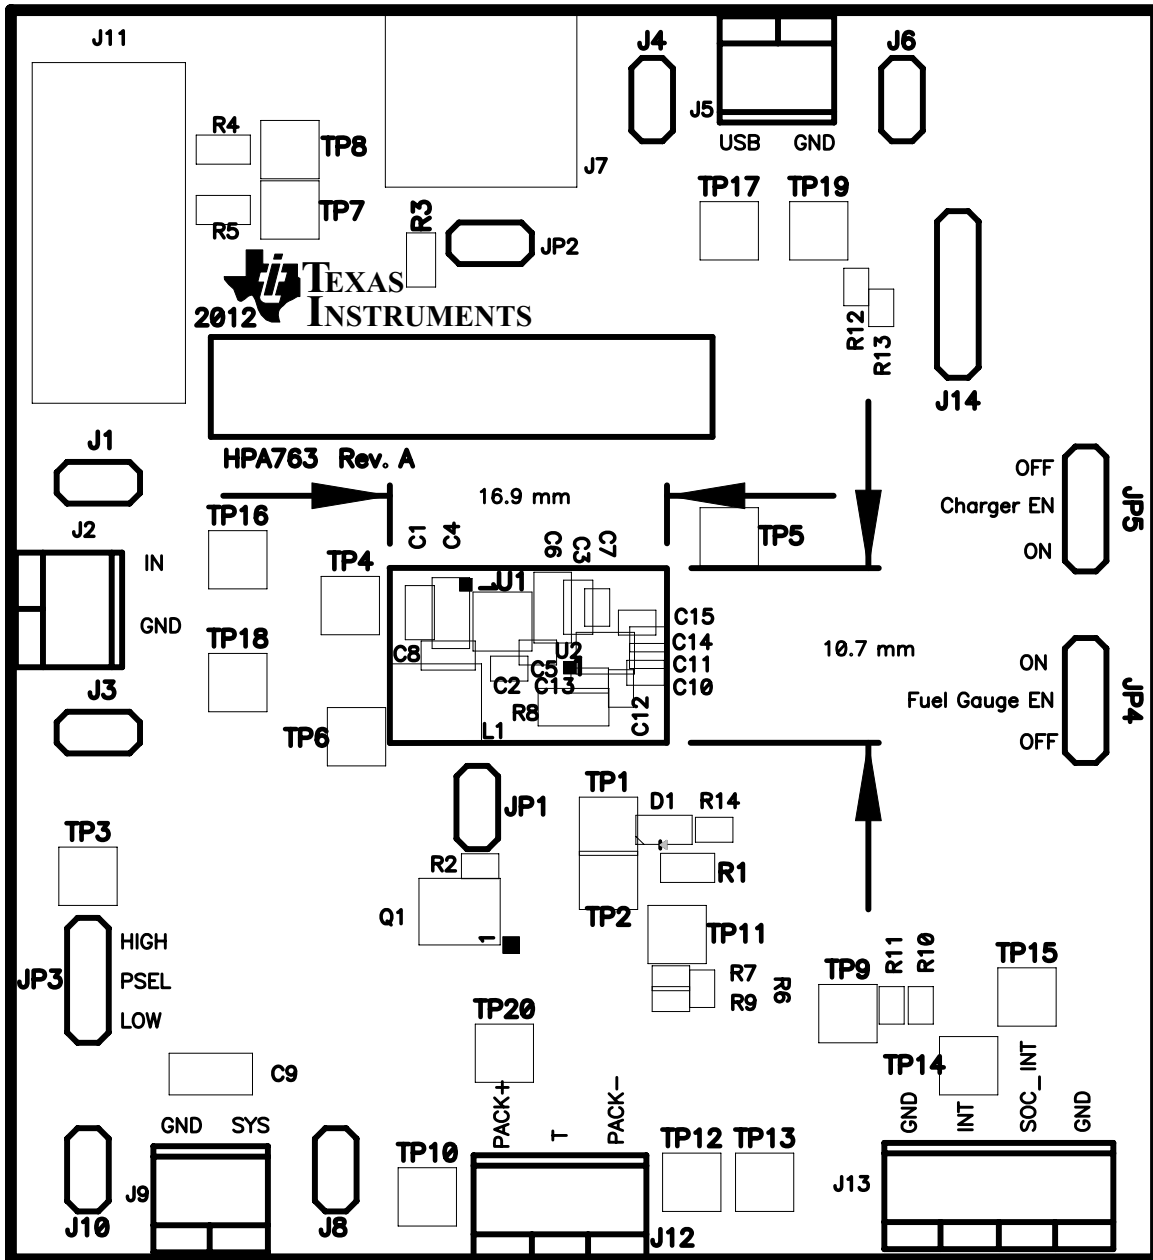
bq27530EVM-001 Layout – Layer 1 Silk Screen
